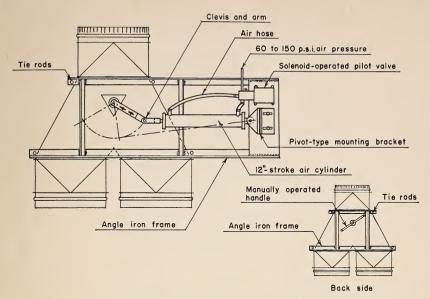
Construction details of standard cotton valve with air cylinder and handle for chain operation.
